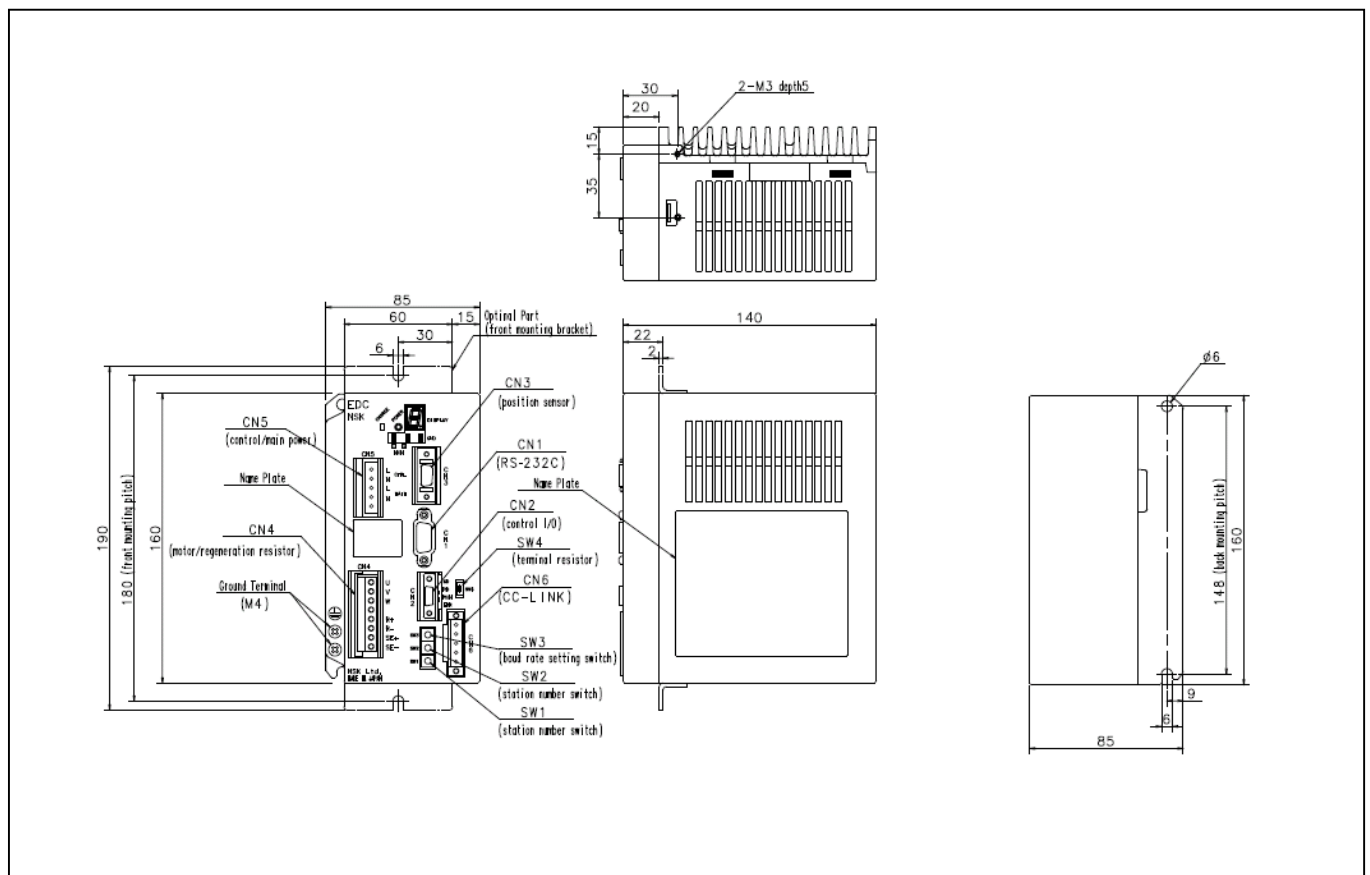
EDC Driver Unit for PN3045, PN4135 and PN4180 Megatorque Motors
